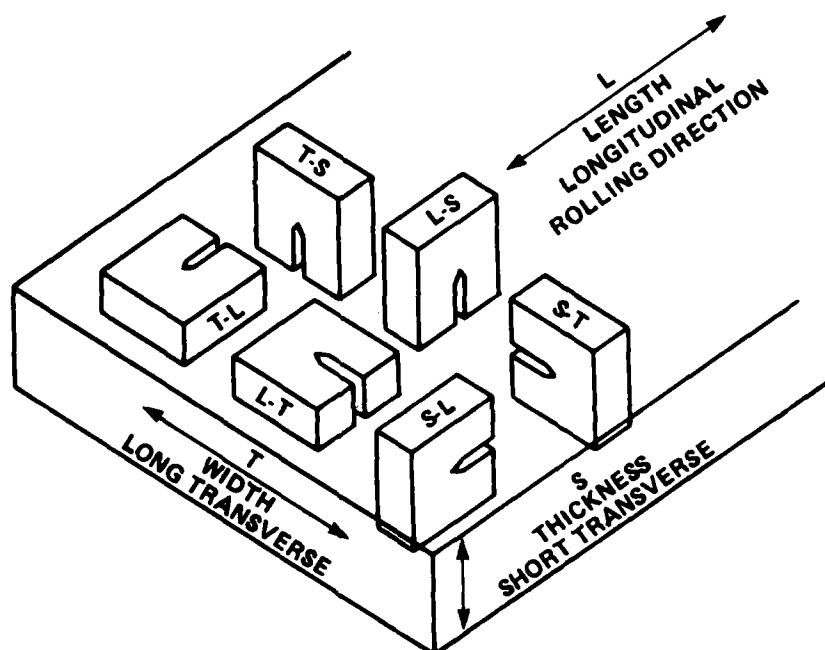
Schematic Drawing of Plate Showing Specimen Orientations
